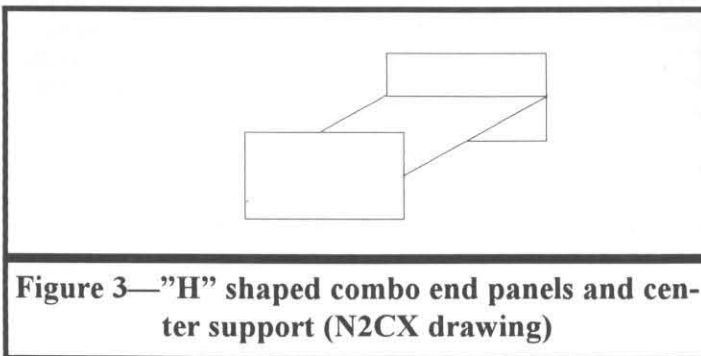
"H" shaped combo end panels and center support (N2CX drawing)
